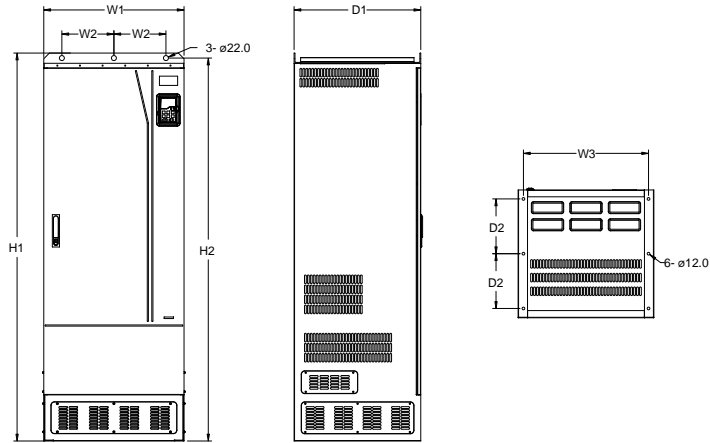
Floor mounting for 660V 400-630kW VFD models
